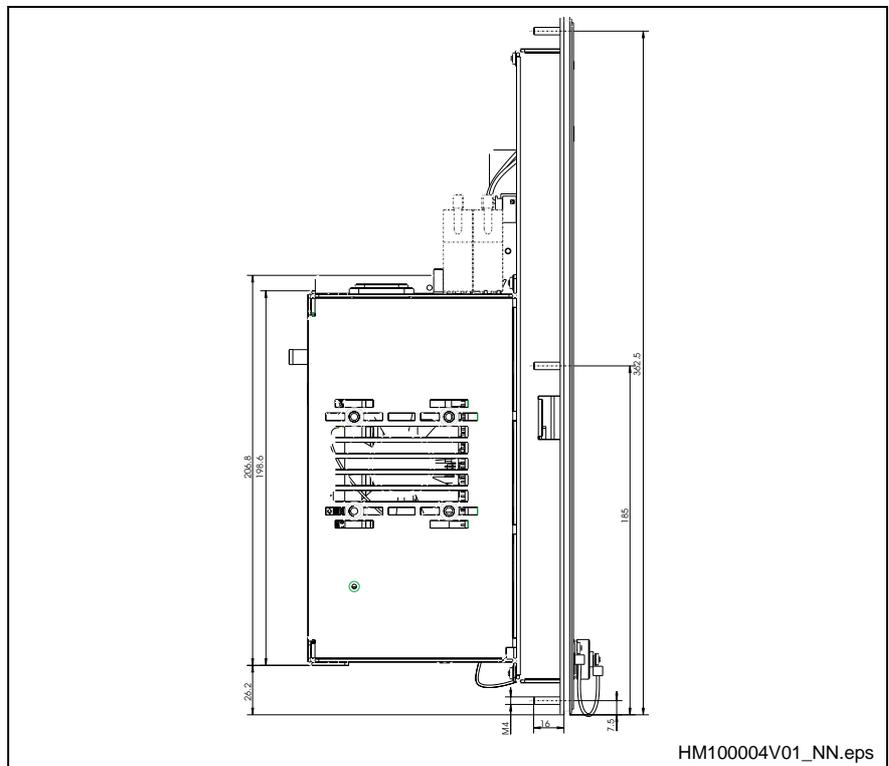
Side view BTV 40.2BE (installation depth depending on the design)
